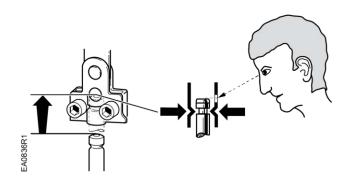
Proper Alignment of the Valve Stem to the Linkage Stem Coupling.
